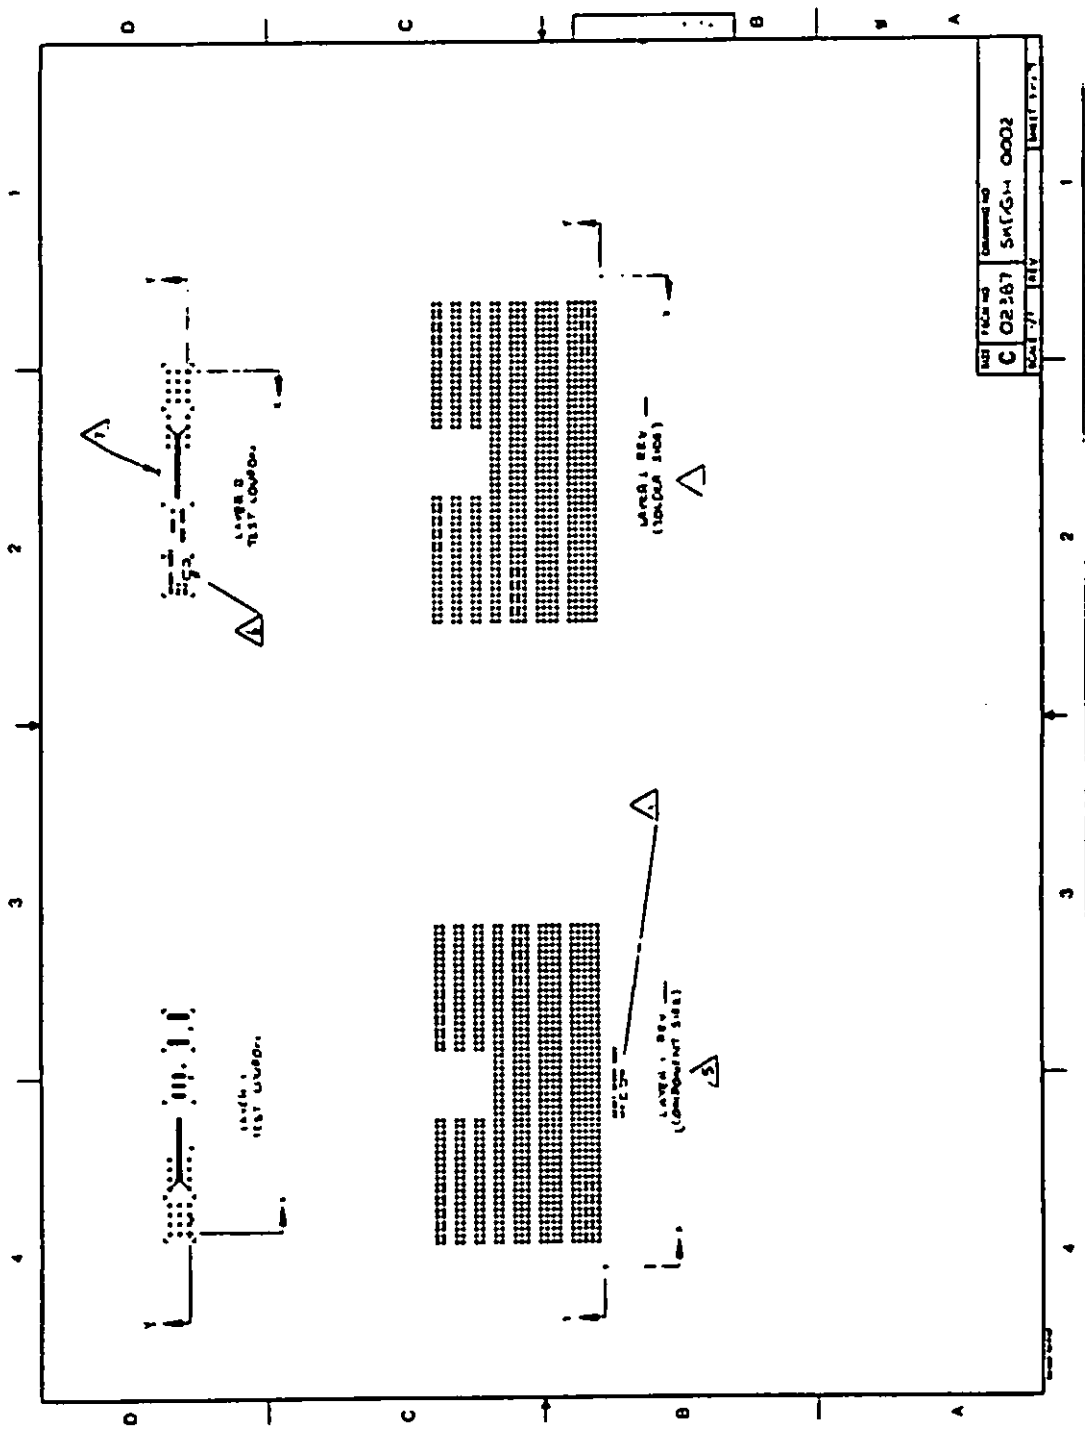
Double sided board, qualification inspection sample - Continued.
